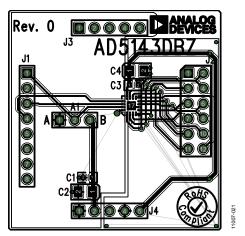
Layer 2 Side PCB Drawing of Daughter Board
